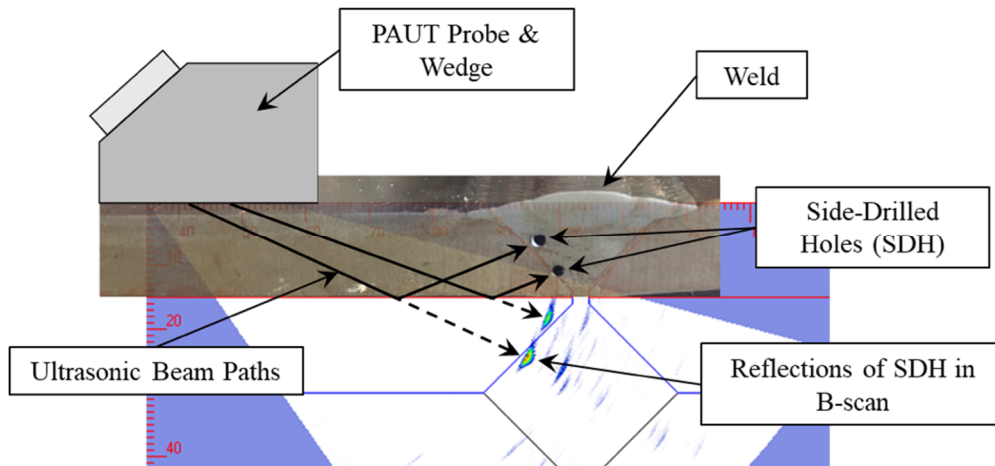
Ultrasonic B-scan for PAUT weld inspection showing full skip inspection of SDH's. This data was collected by the author.
